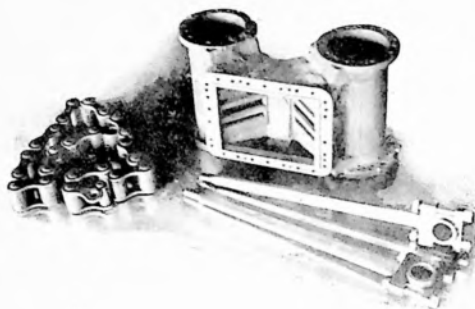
Cylinders, Connecting Rods, and Chain.
